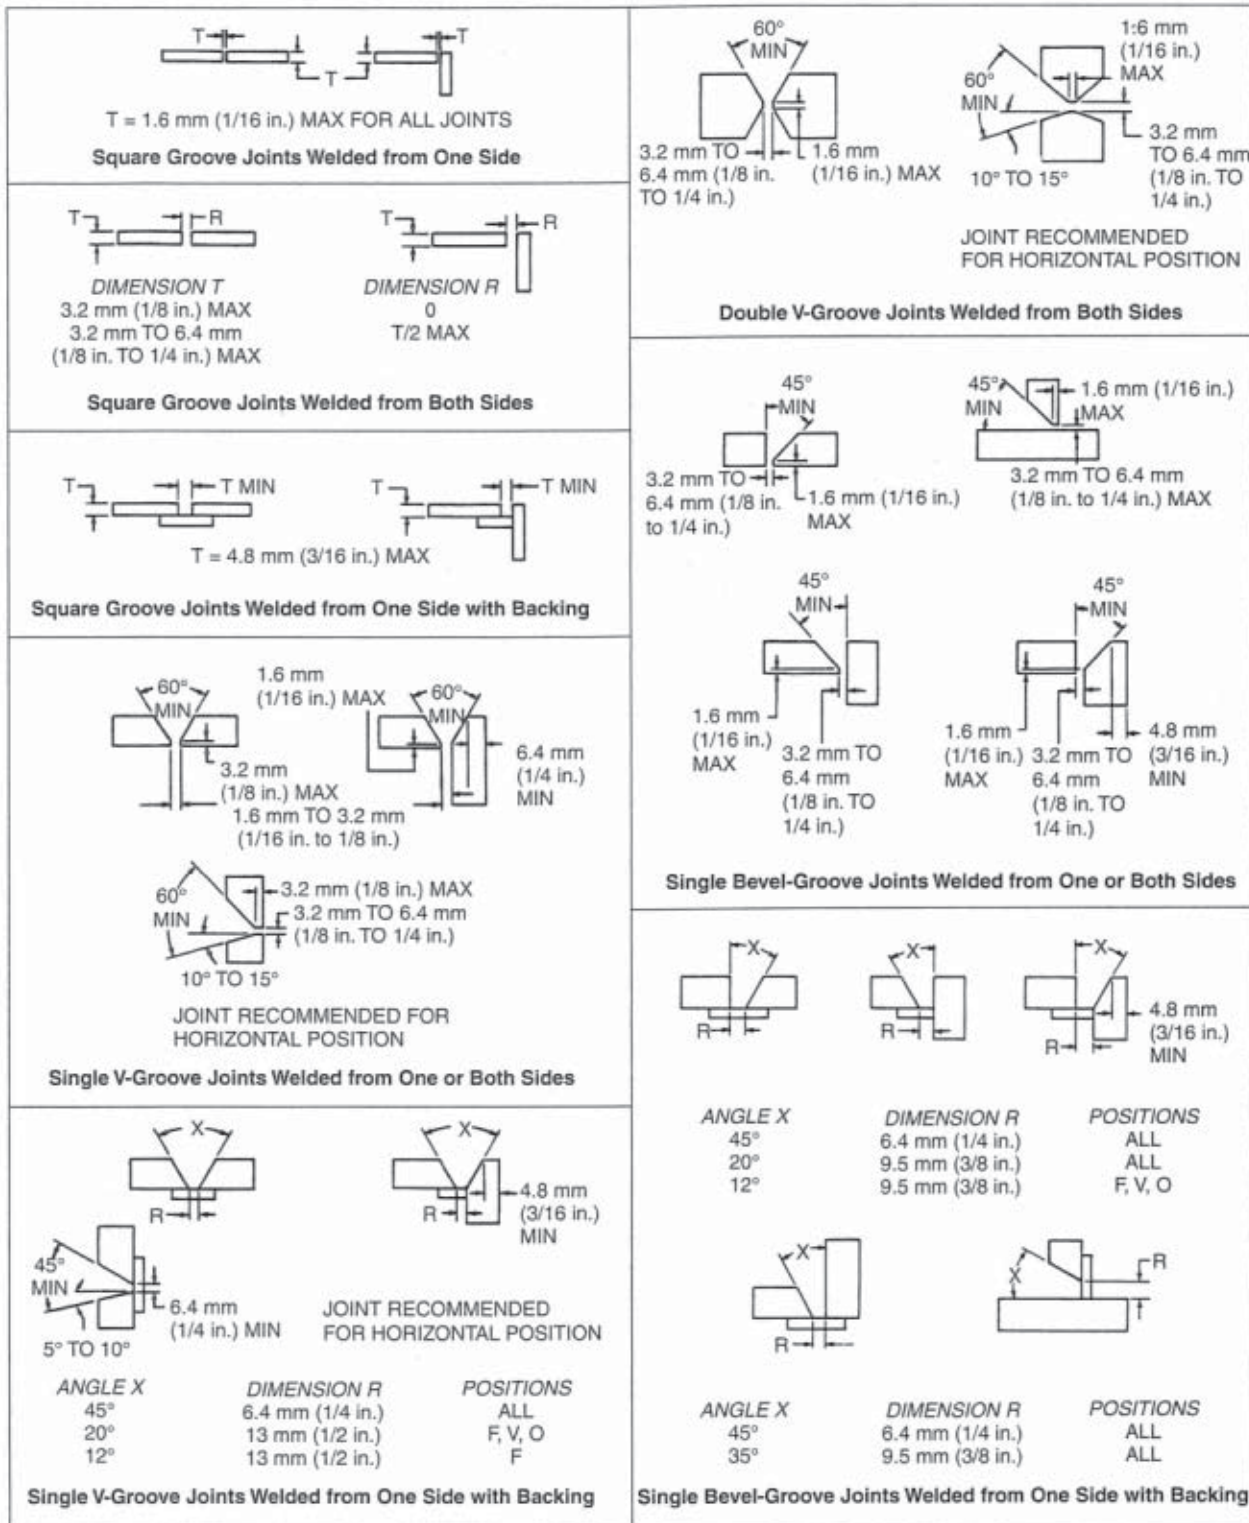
Typical joint geometries for the shielded metal arc welding of steel.
